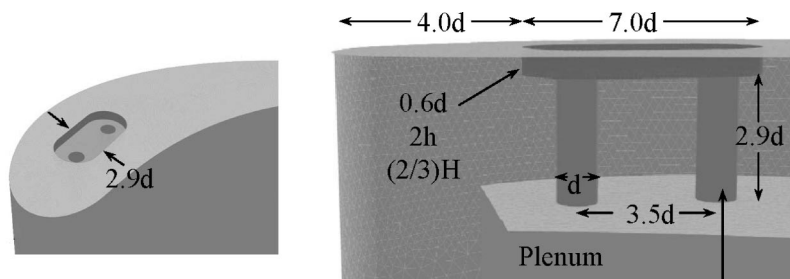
The blade tip included a plenum that supplied coolant to the dirt purge holes
